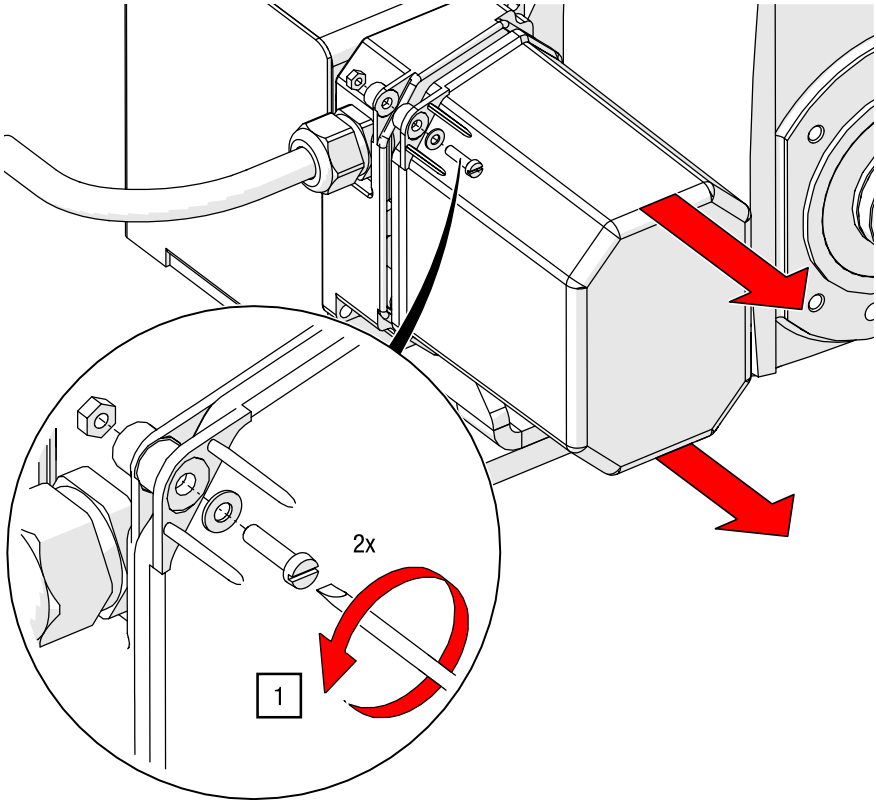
Setting the emergency limit switches – opening the limit switch enclosure
